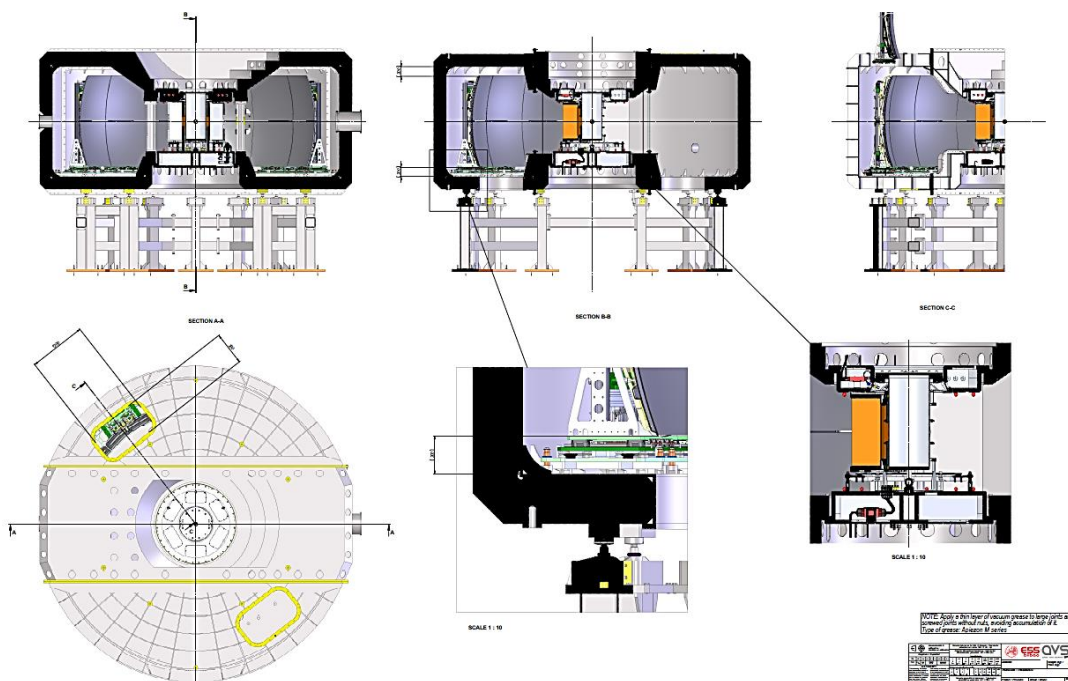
Assembly drawing of the MIRACLES vessel and in-vessel mechanical assemblies.
